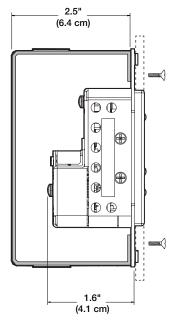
Wall Box Depth Profile — AAP and Decorator-Style
